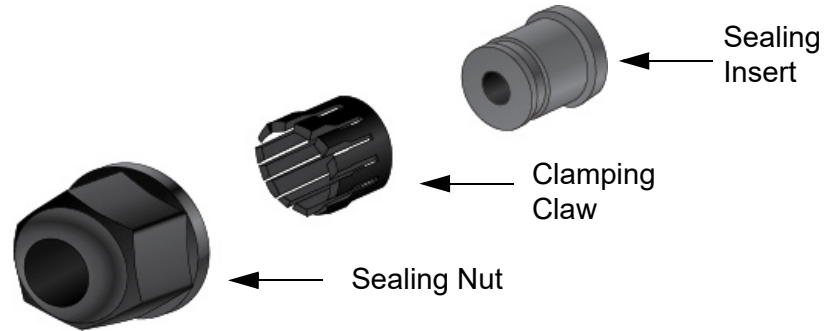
Sealing Nut, Clamping Claw, and Sealing Insert
